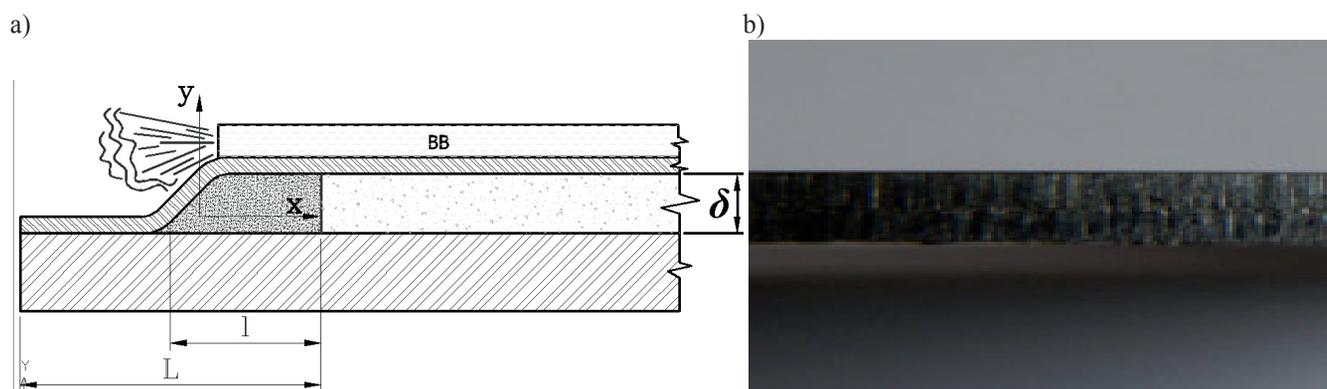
Scheme of explosive welding (a) and sample of biematlic plate (b) obtained with such technology
